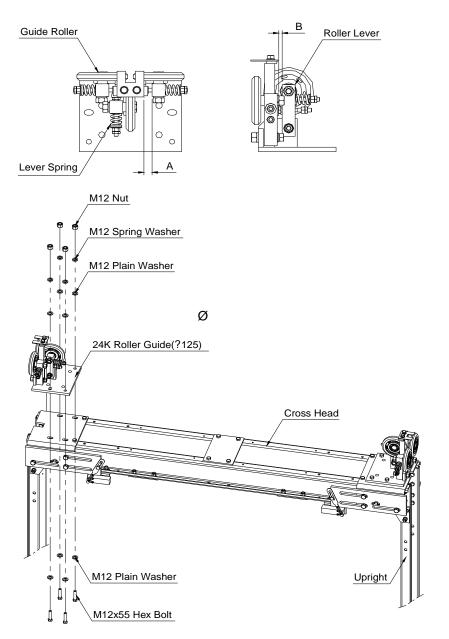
TOP GUIDE ROLLER INSTALLATION (Underslung Fork type)
